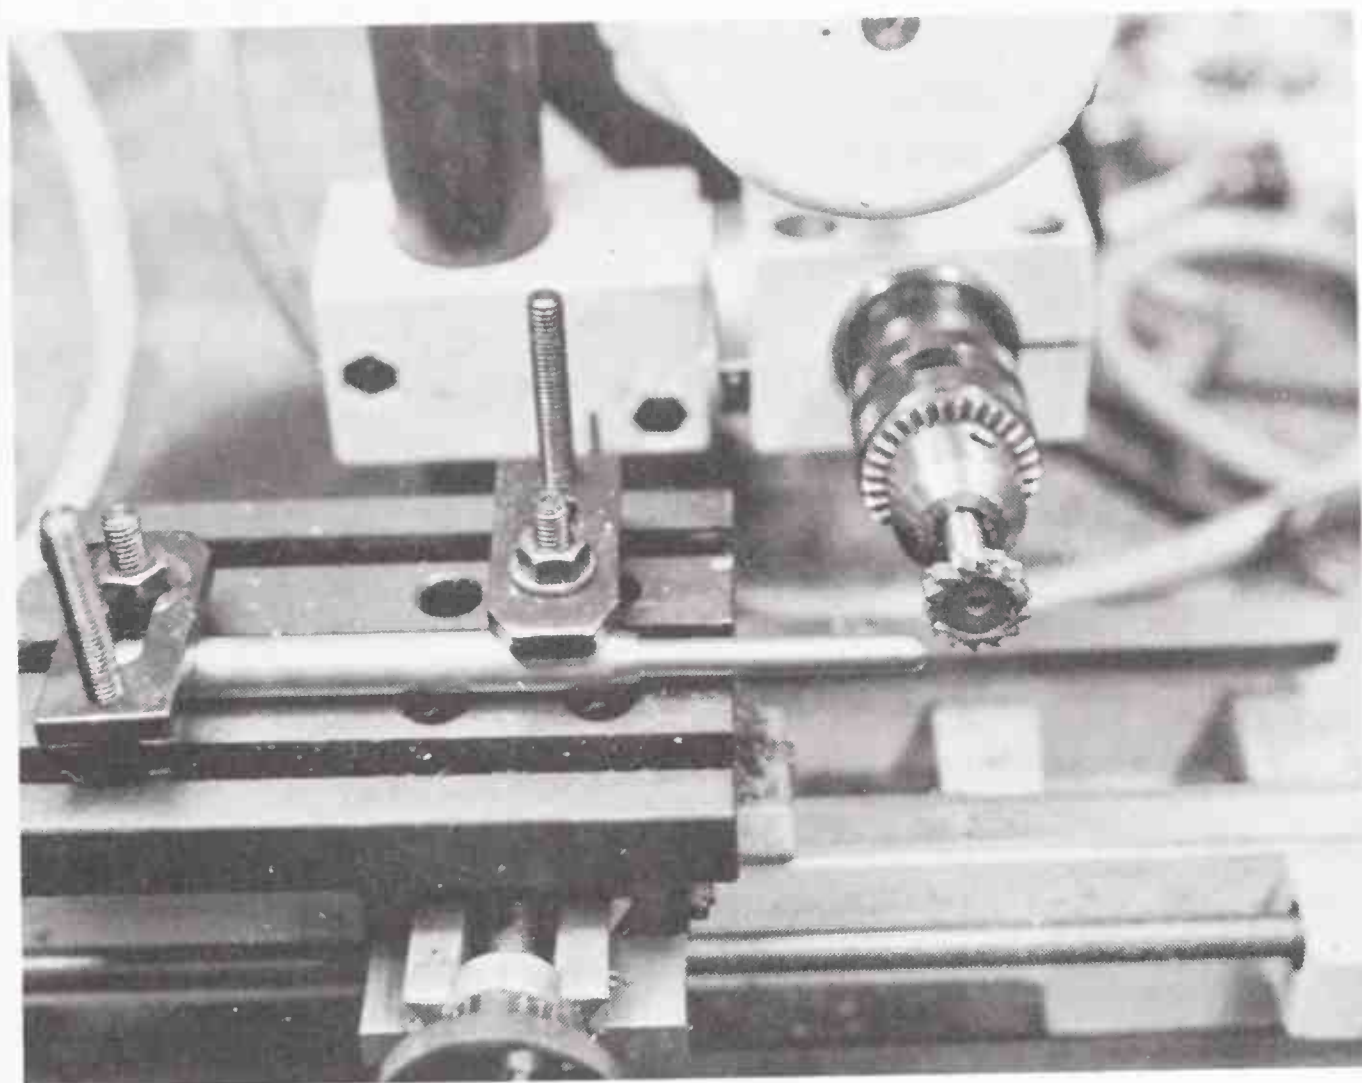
Unimat 3 in milling position finishing up a .22 rim-fire chamber "ironing tool."
